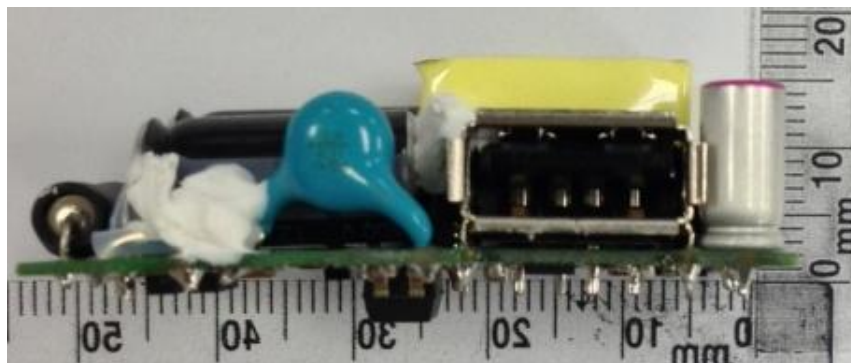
Flank View (Dimension 15 x 45 [mm²])
